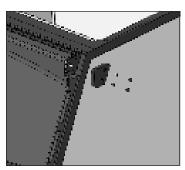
Exploded view of door bracket end cap, screws, and screw caps.
